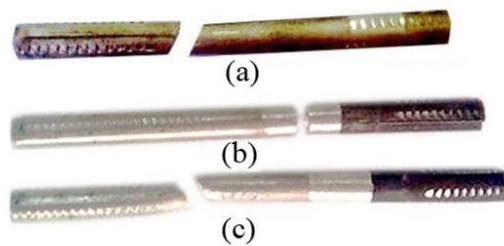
Fractured samples after tension tests: (a) the initial material without weld seam; (b) fracture inside the weld seam region, i.e., false welded; (c) fractured outside the weld seam region, i.e., well welded.
